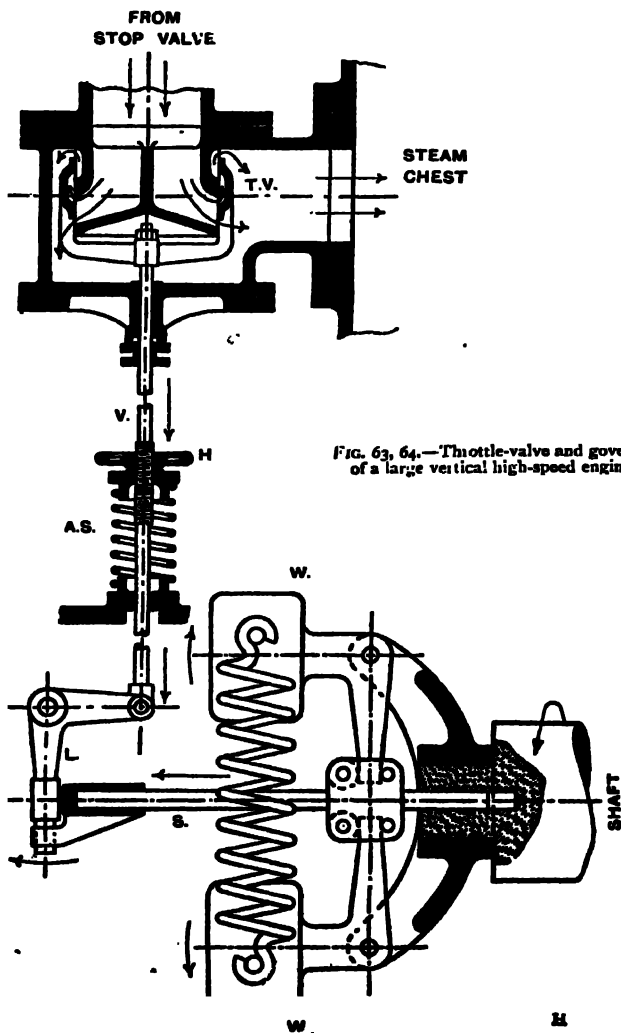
, 64.—Throttle-valve and governor of a large vertical high-speed engine.
